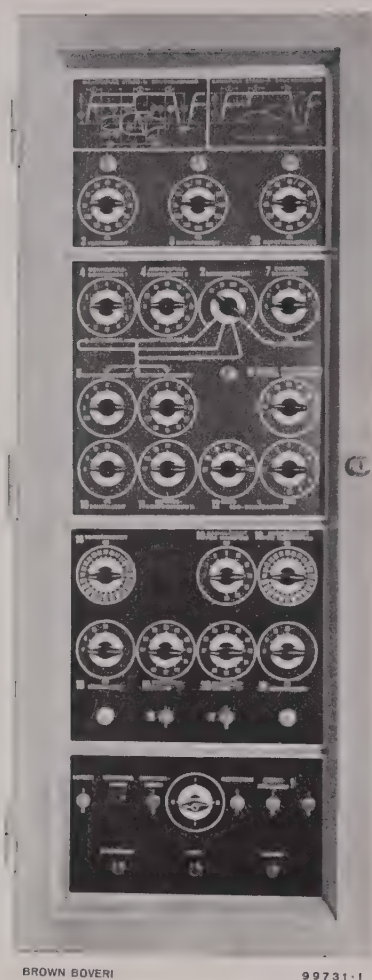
Control board for three-phase control of the high-capacity spot welding machine
